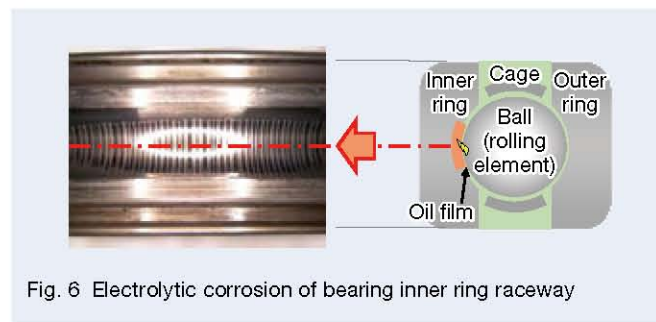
Electrolytic corrosion of bearing inner ring raceway
